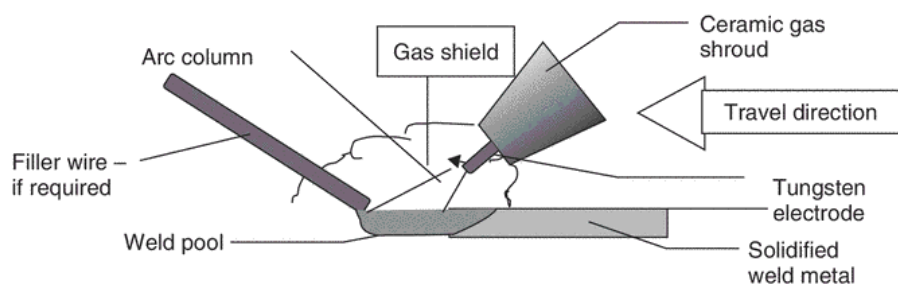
Principle of the TIG welding process (Mathers, p.98)
